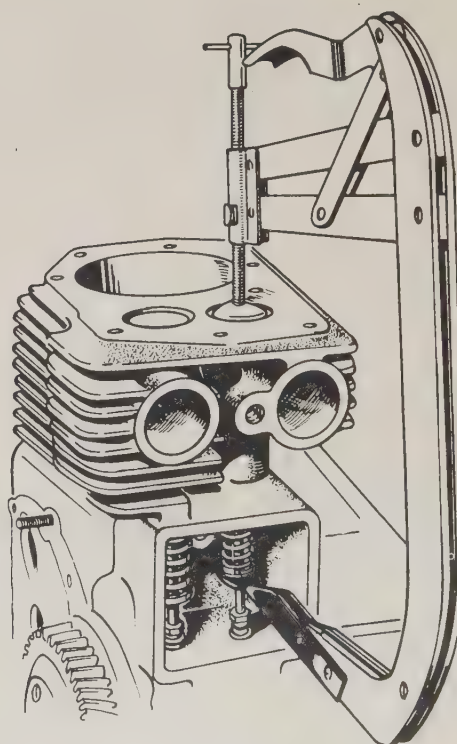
Using the automotive type of valve-spring compressor. (Onan Corporation)
